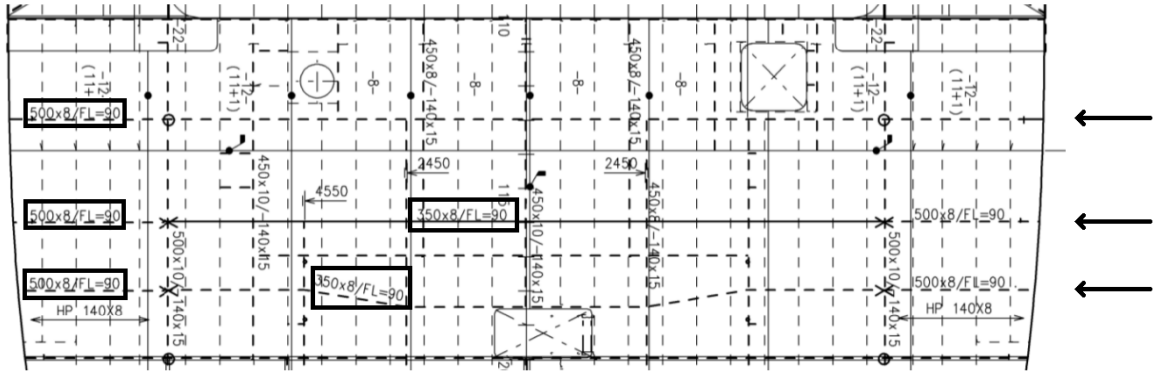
Transverse primary stiffeners on deck, indicated with arrows
